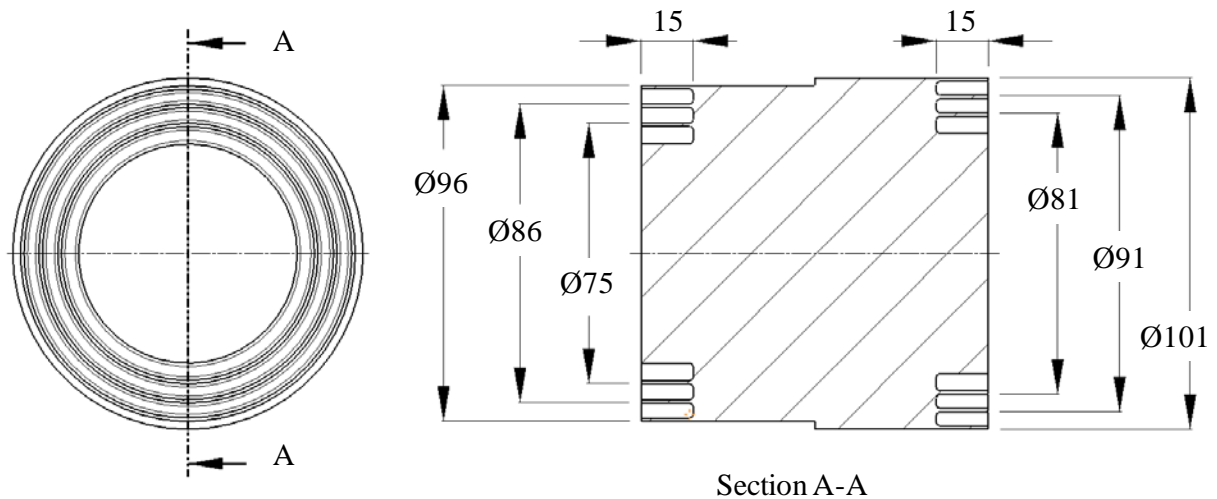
Resulting workpiece geometry derived from the initial six face grooving operations that took place on Inconel 718 (dimensions in mm), for reference only.
